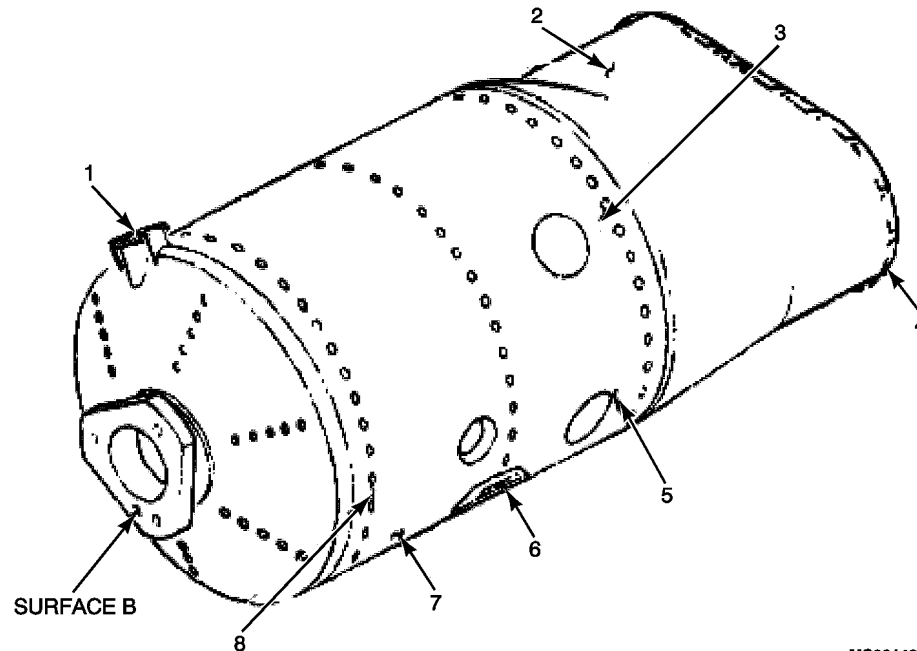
Combustor Assembly (MEP 83-360A and MEP 83-360D/E).
